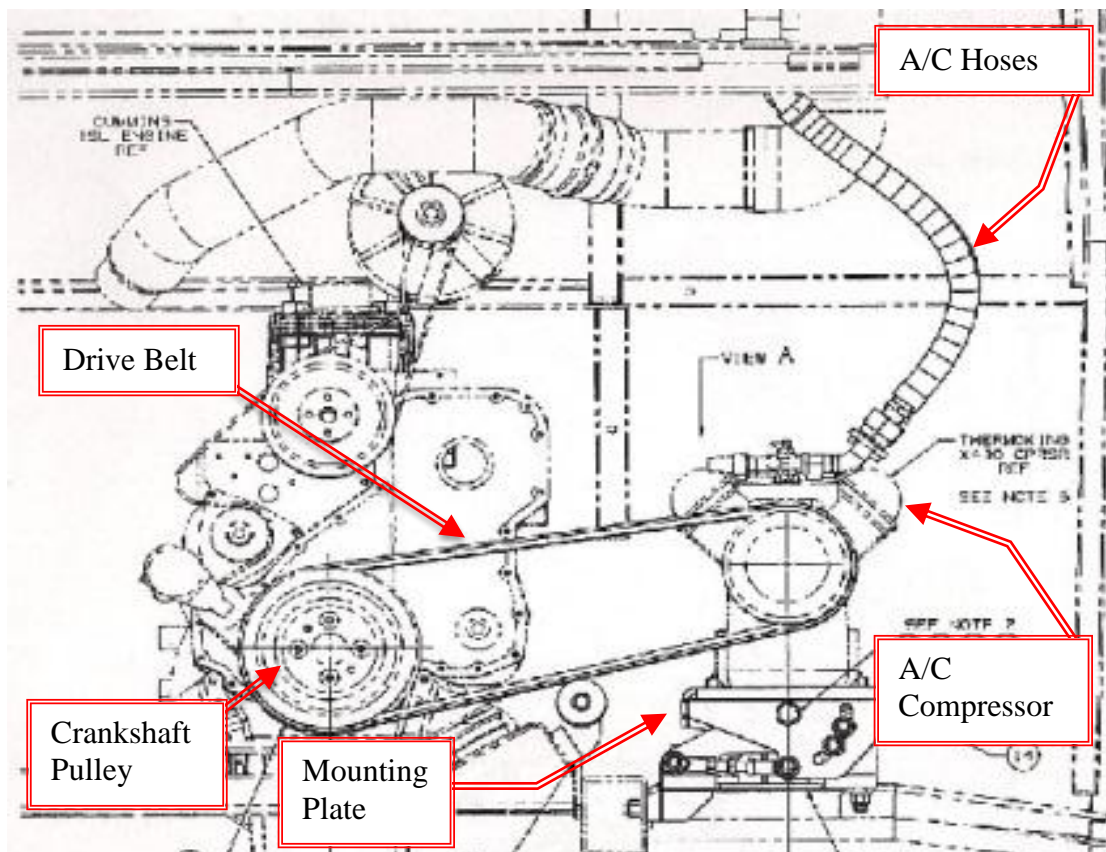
CAD drawing of current engine layout [5]. Used with permission
